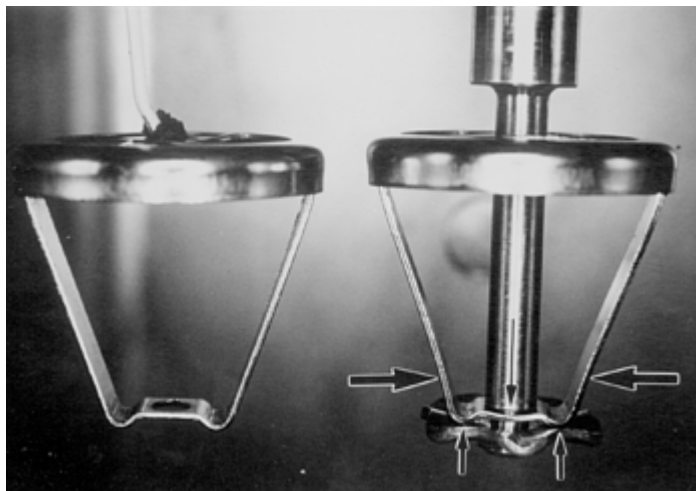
Ice cream mixer blade as manufactured (left) and assembled to spindle (right)
